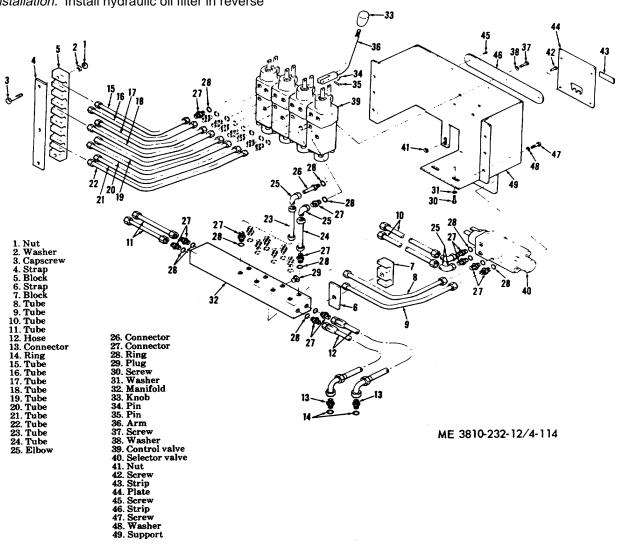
Manifold, control valves, and related parts, removal and installation (model S80).
